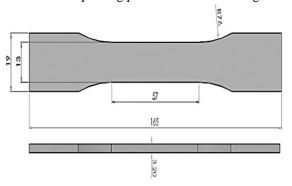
The dimensions of tensile test specimen as per ASTM D638-Type I standard
